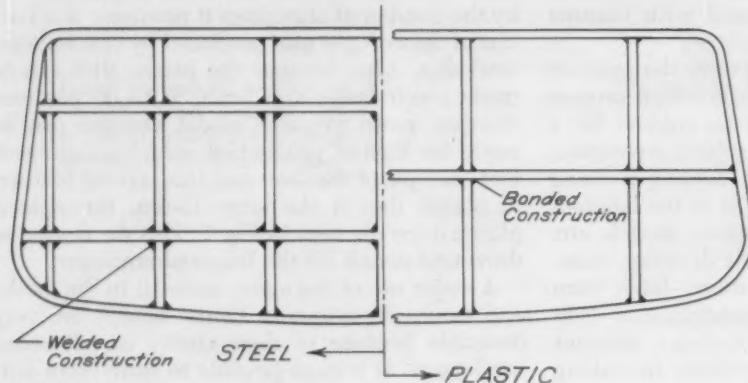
Weight of plastic fixture (right) for checking automotive body windshield openings is 80 per cent less than the steel fixture at left, thus simplifying its use in production. More supports are needed on the steel fixture because of its weight.
